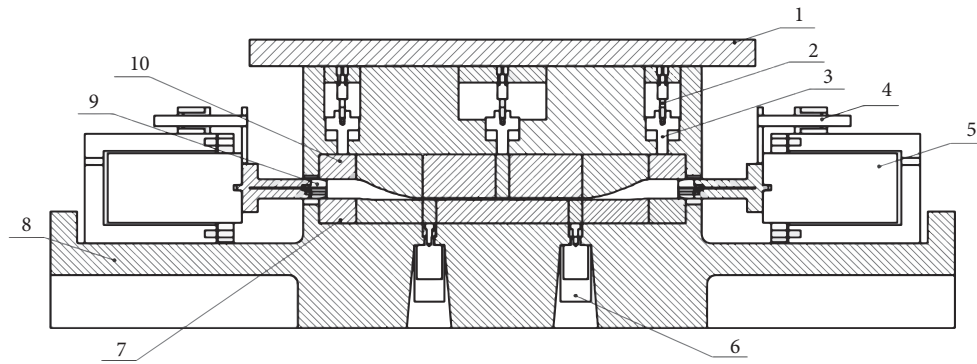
General assembly diagram of hydraulic expansion die for torsion beam: (1) upper die base; (2) cylinder; (3) pull-out rod of upper die; (4) displacement sensor; (5) hydraulic cylinder; (6) ejection cylinder; (7) matrix; (8) lower die base; (9) sealing plug; (10) punch.
